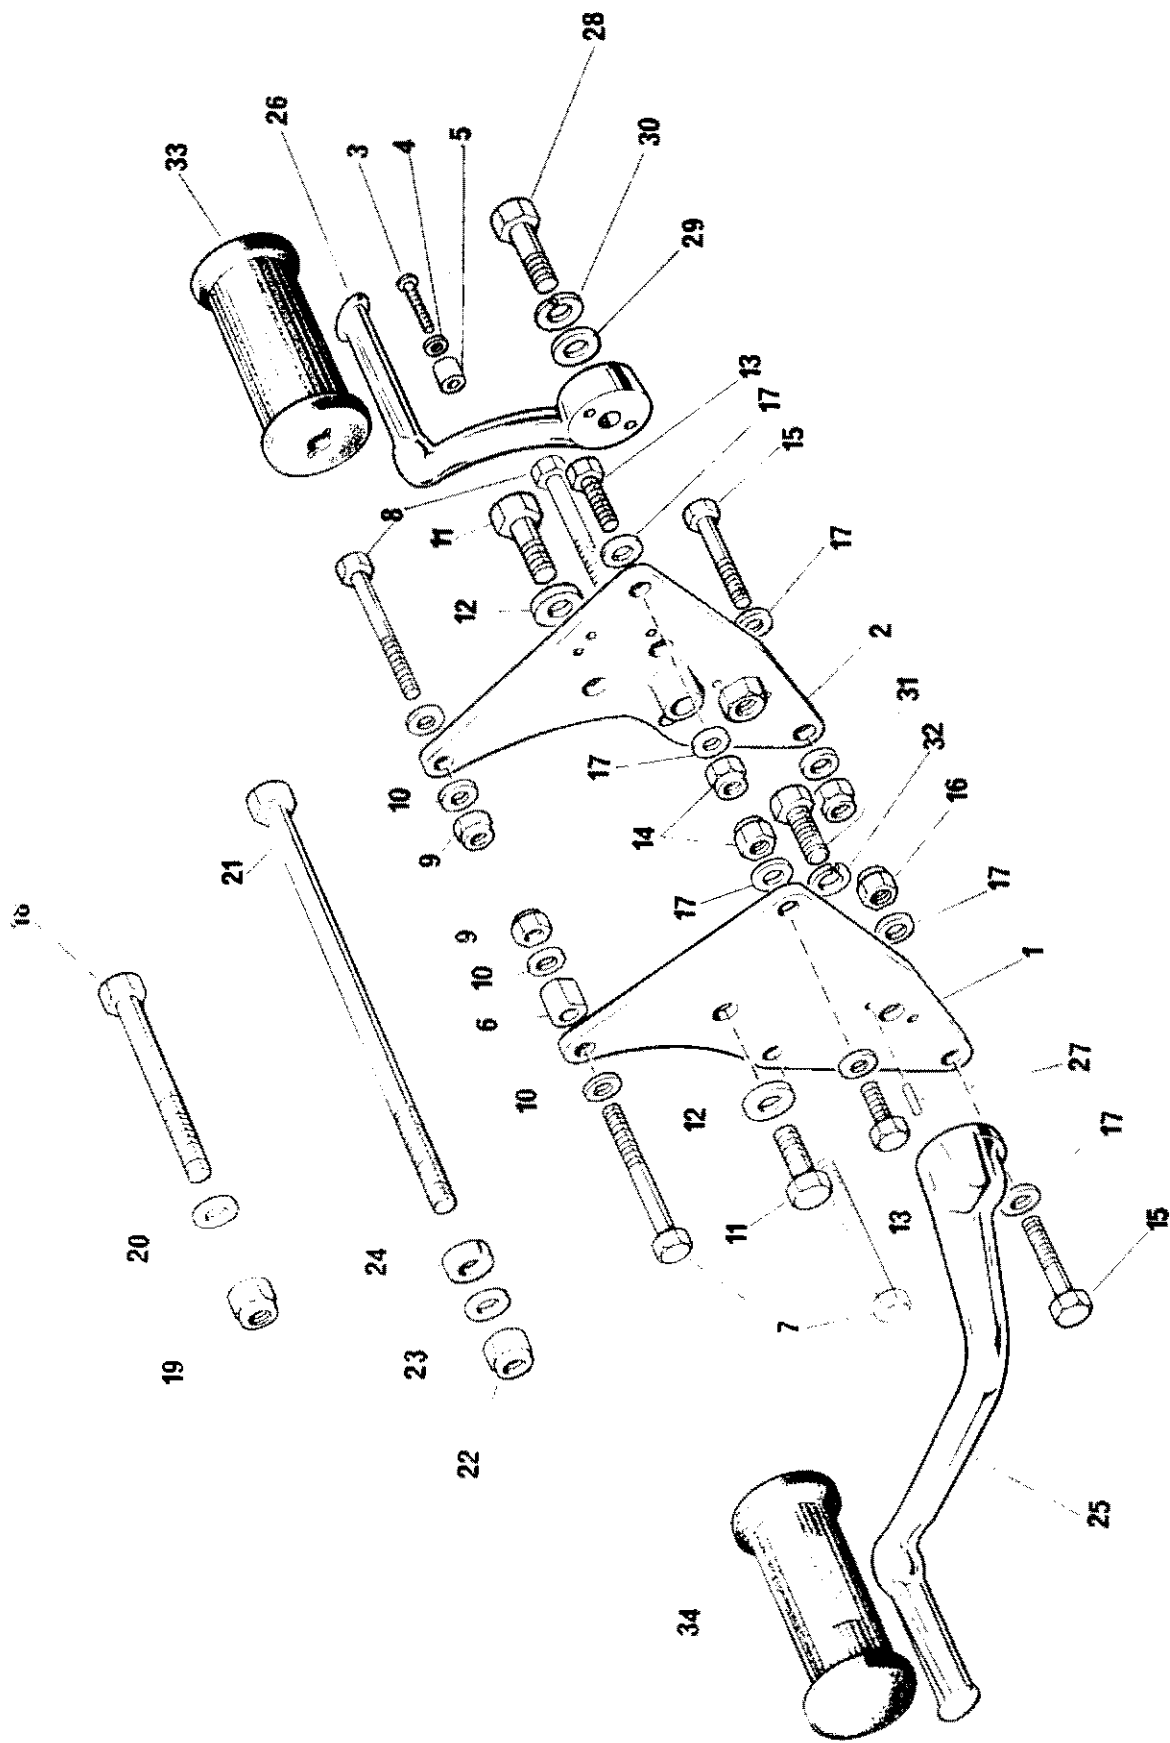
ENGINE UNIT FITTINGS AND FOOTPEGS
